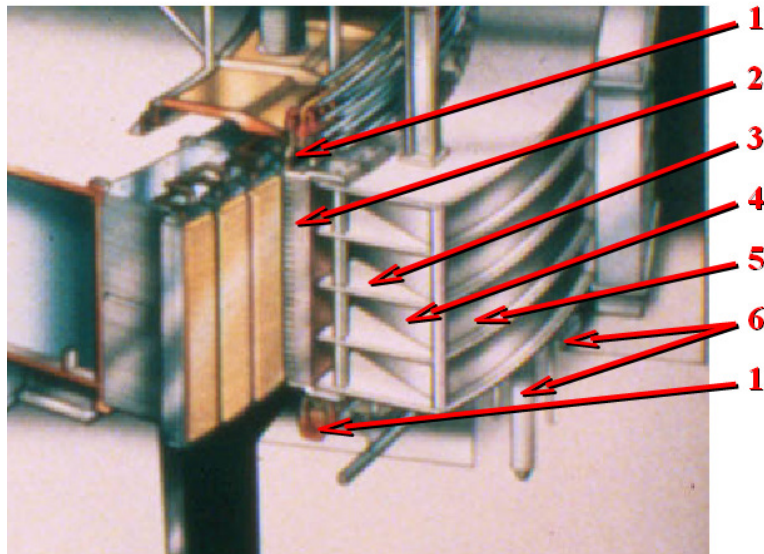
Drawing of “Grand Coulee” (84 poles, 718MVA, 85.7 RPM)
